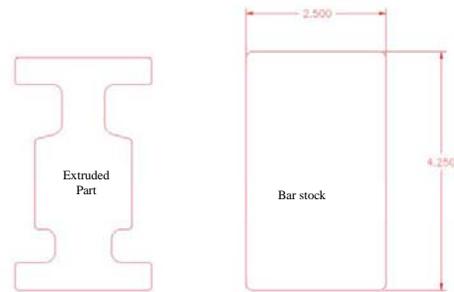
Illustration of an extruded part and a bar stock used to machine the finished valve body.
